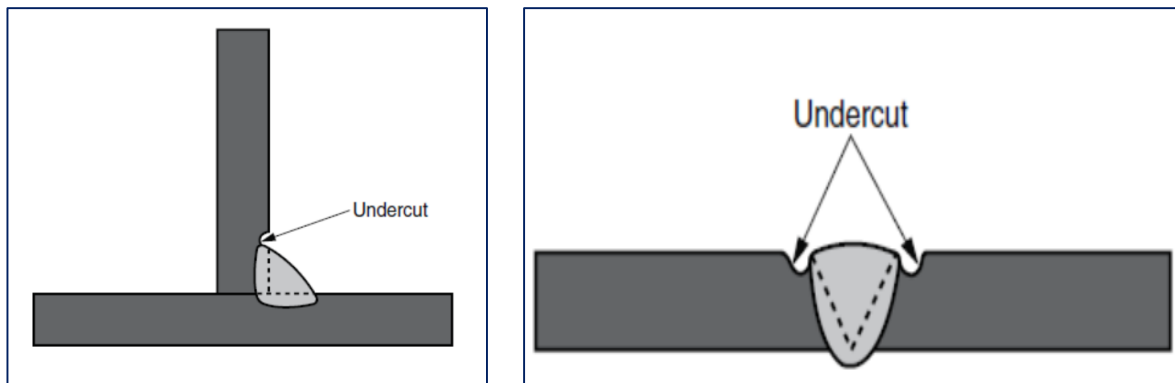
Undercut defect in butt and fillet welded joints [111]
